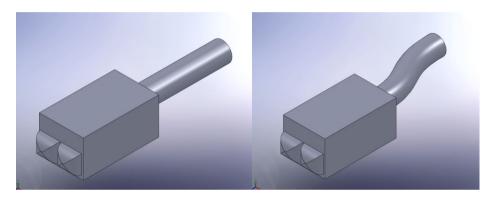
Instrument design-receiver 26A01B 6mm and 6mm curved tube
